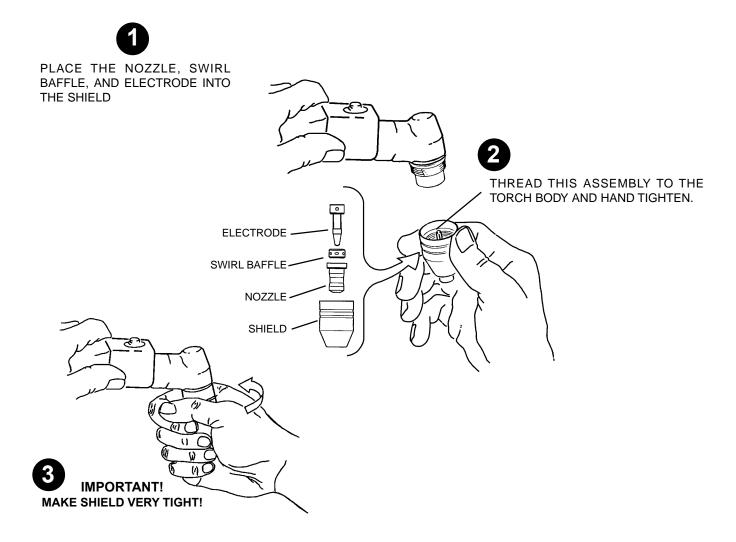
Assembly of PT-27 Torch Front End Parts
